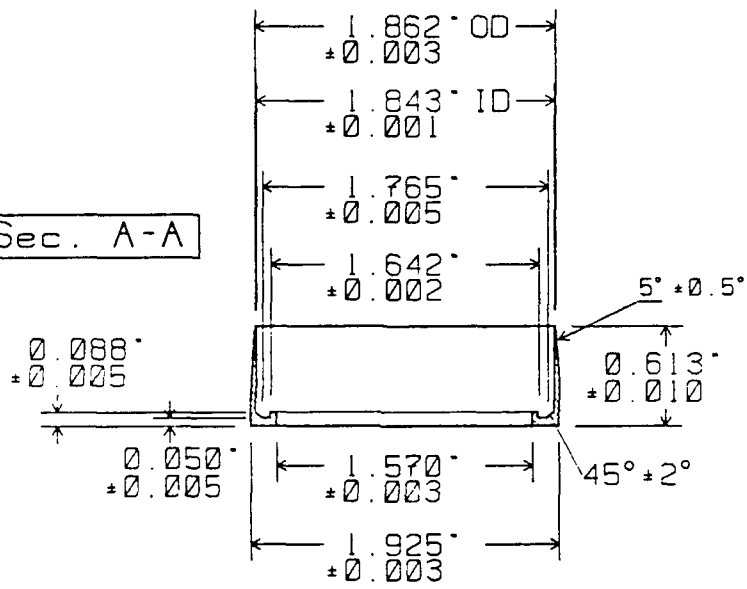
Cold Heat Exchanger Mounting Ring and Filler
